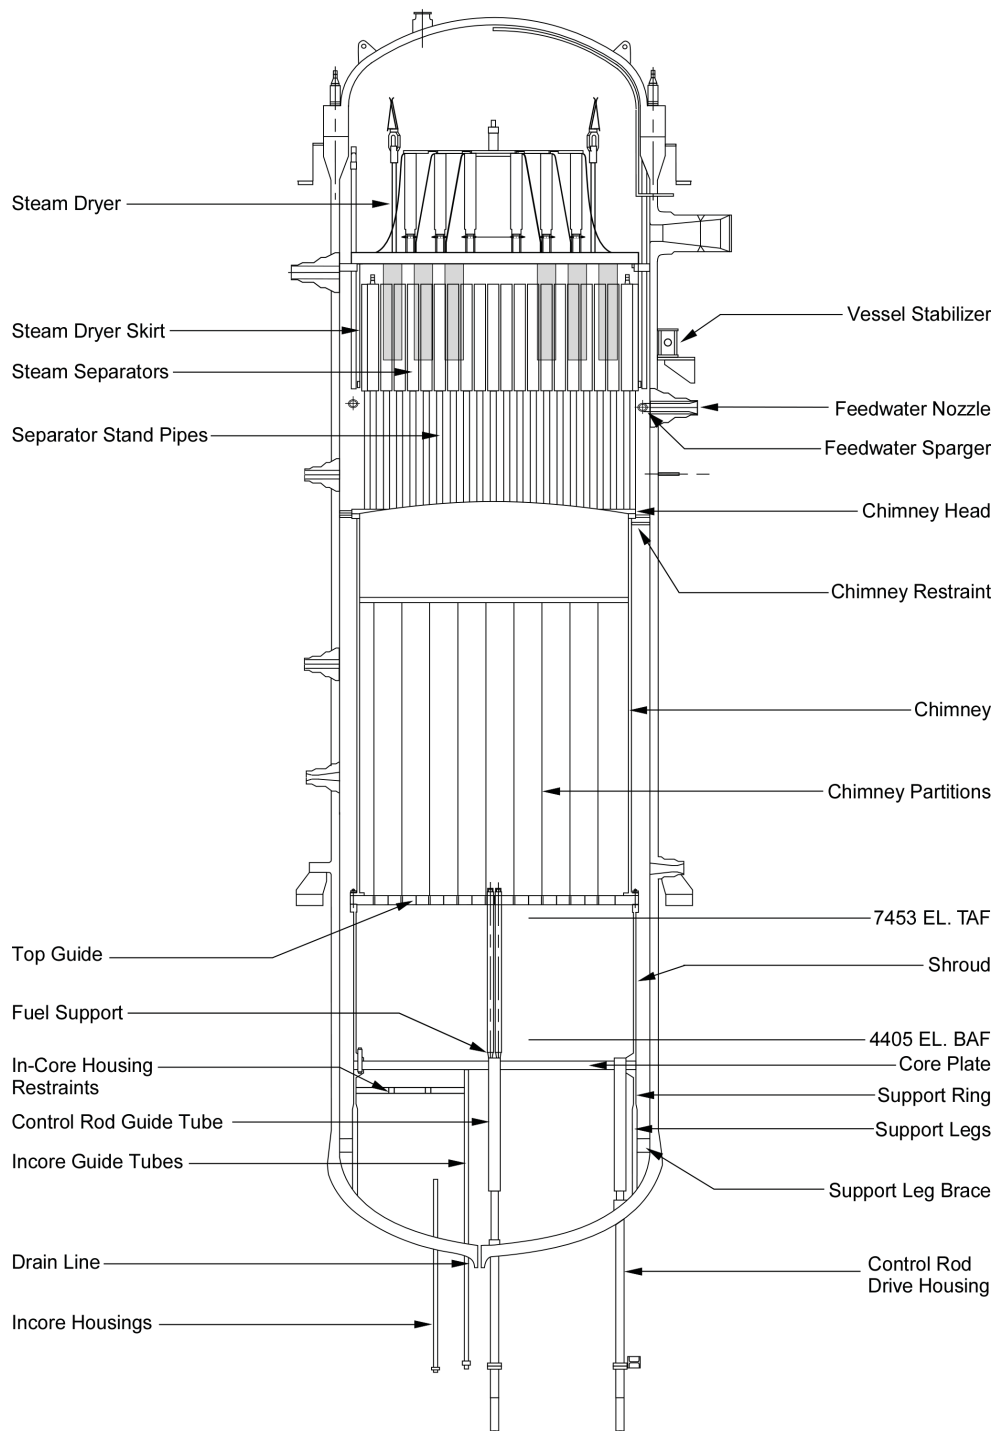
Typical Shroud, Chimney, and Top Guide Assembly
